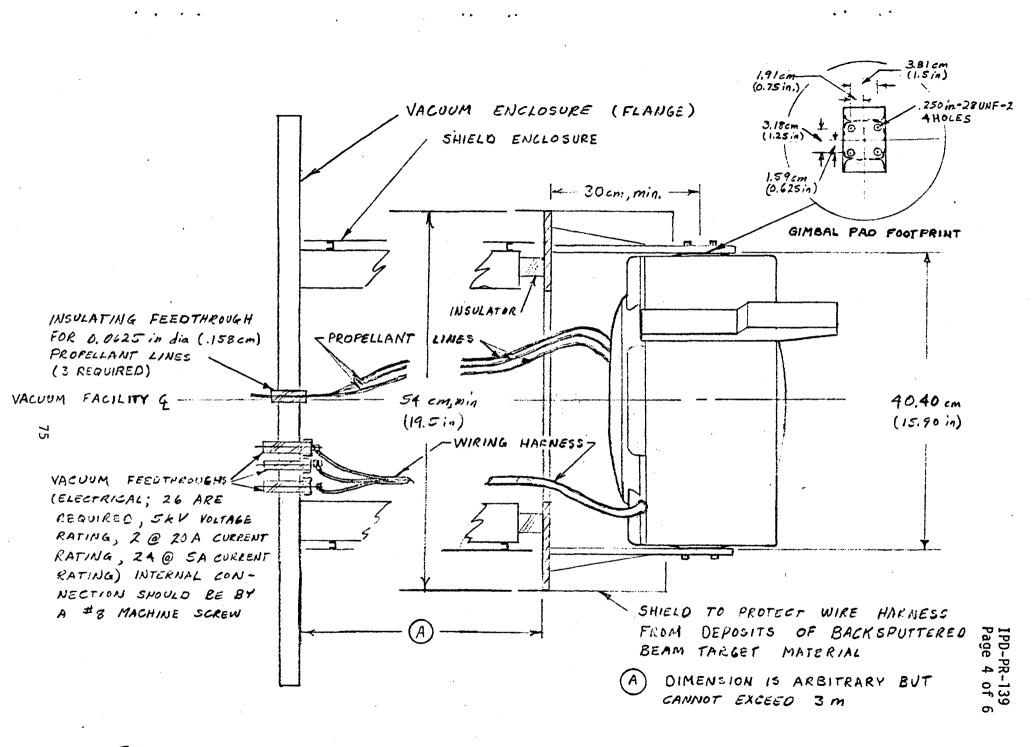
MOUNTING FOR THRUSTER ASSEMBLY FOR INSTALLATION IN VACUUM CHAMBER TEST FACILITY
